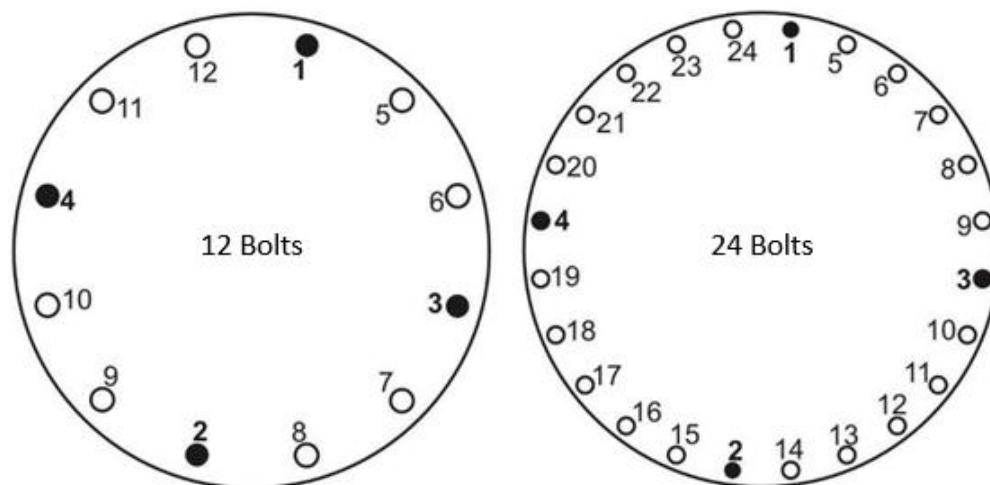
Bolt tightening method 2: Alternative bolt tightening method
